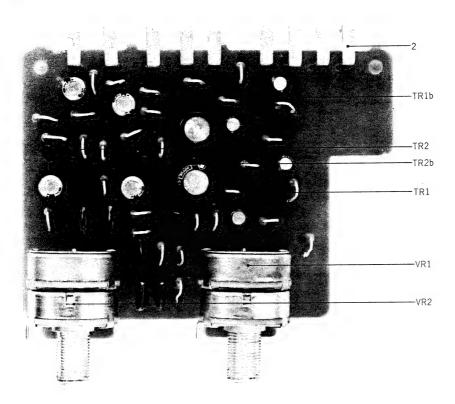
PHOTO OF RECTIFIER P.C. BOARD (98-5010) BLOCK
